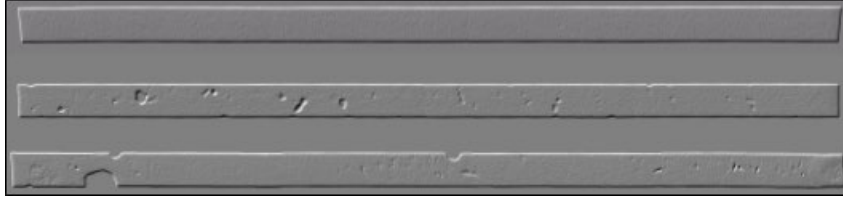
X-Ray Inspection of Solder Test Specimens (Good and Bad Samples)
